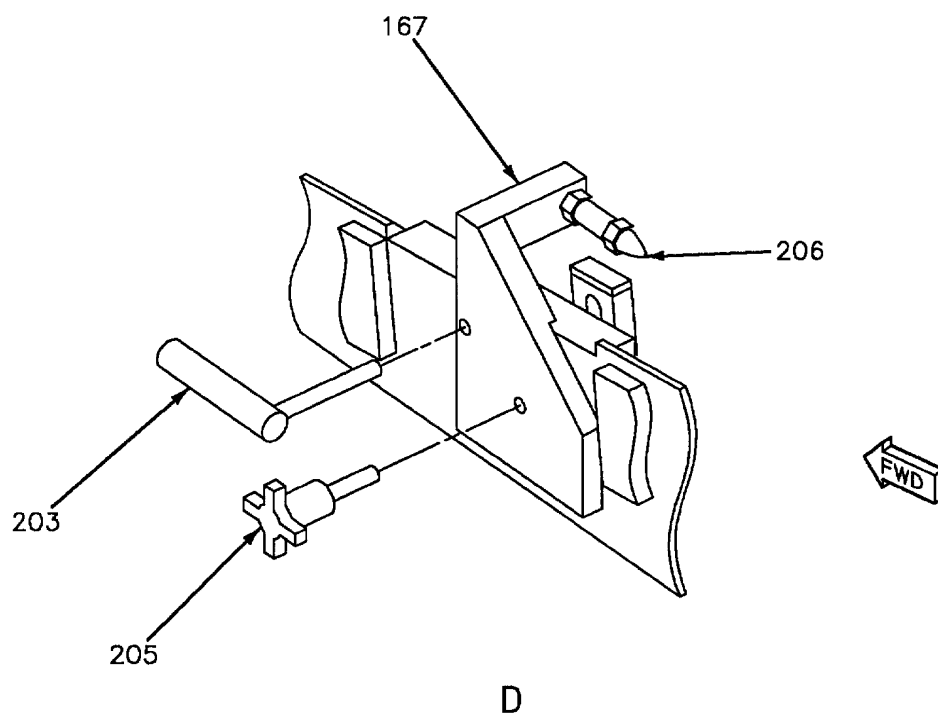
Loading Aileron Assembly into Maintenance Fixture (Sheet 3)
